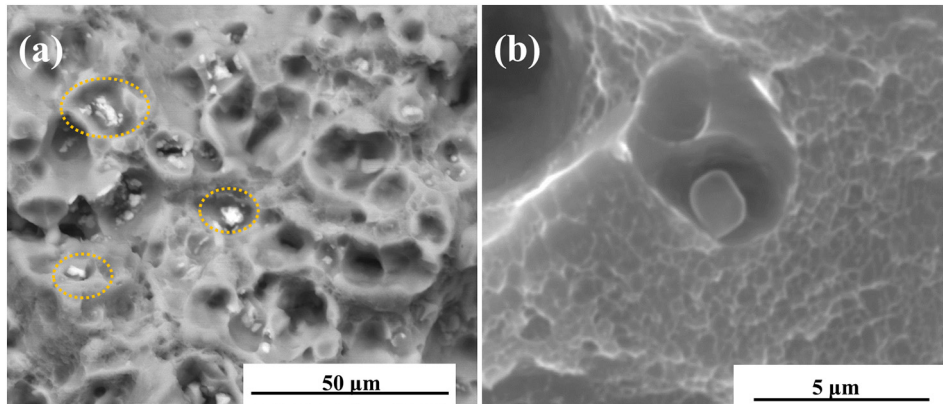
Dimple nucleation sites in the final overload fracture zone of fatigue fractured samples.
